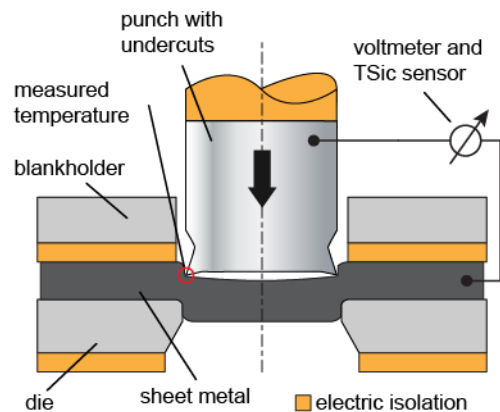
Tool-workpiece-thermocouple for measuring thermoelectric voltage and temperature after [8]
